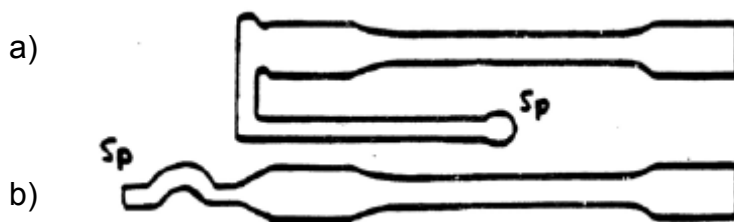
Examples of single cavity mouldings, with sprue  $S_p$
